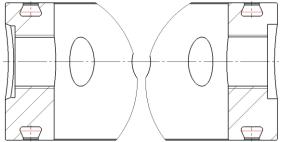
Two different types of threaded holes in the test ring. The hole on the left side has a chamfered edge.
